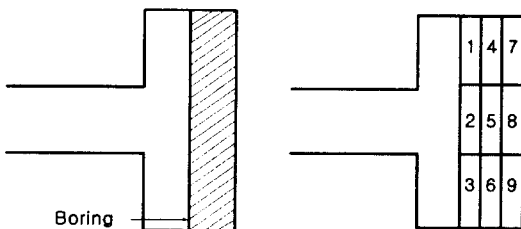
A repair welding method for cylinder block o-ring seat of diesel engines
